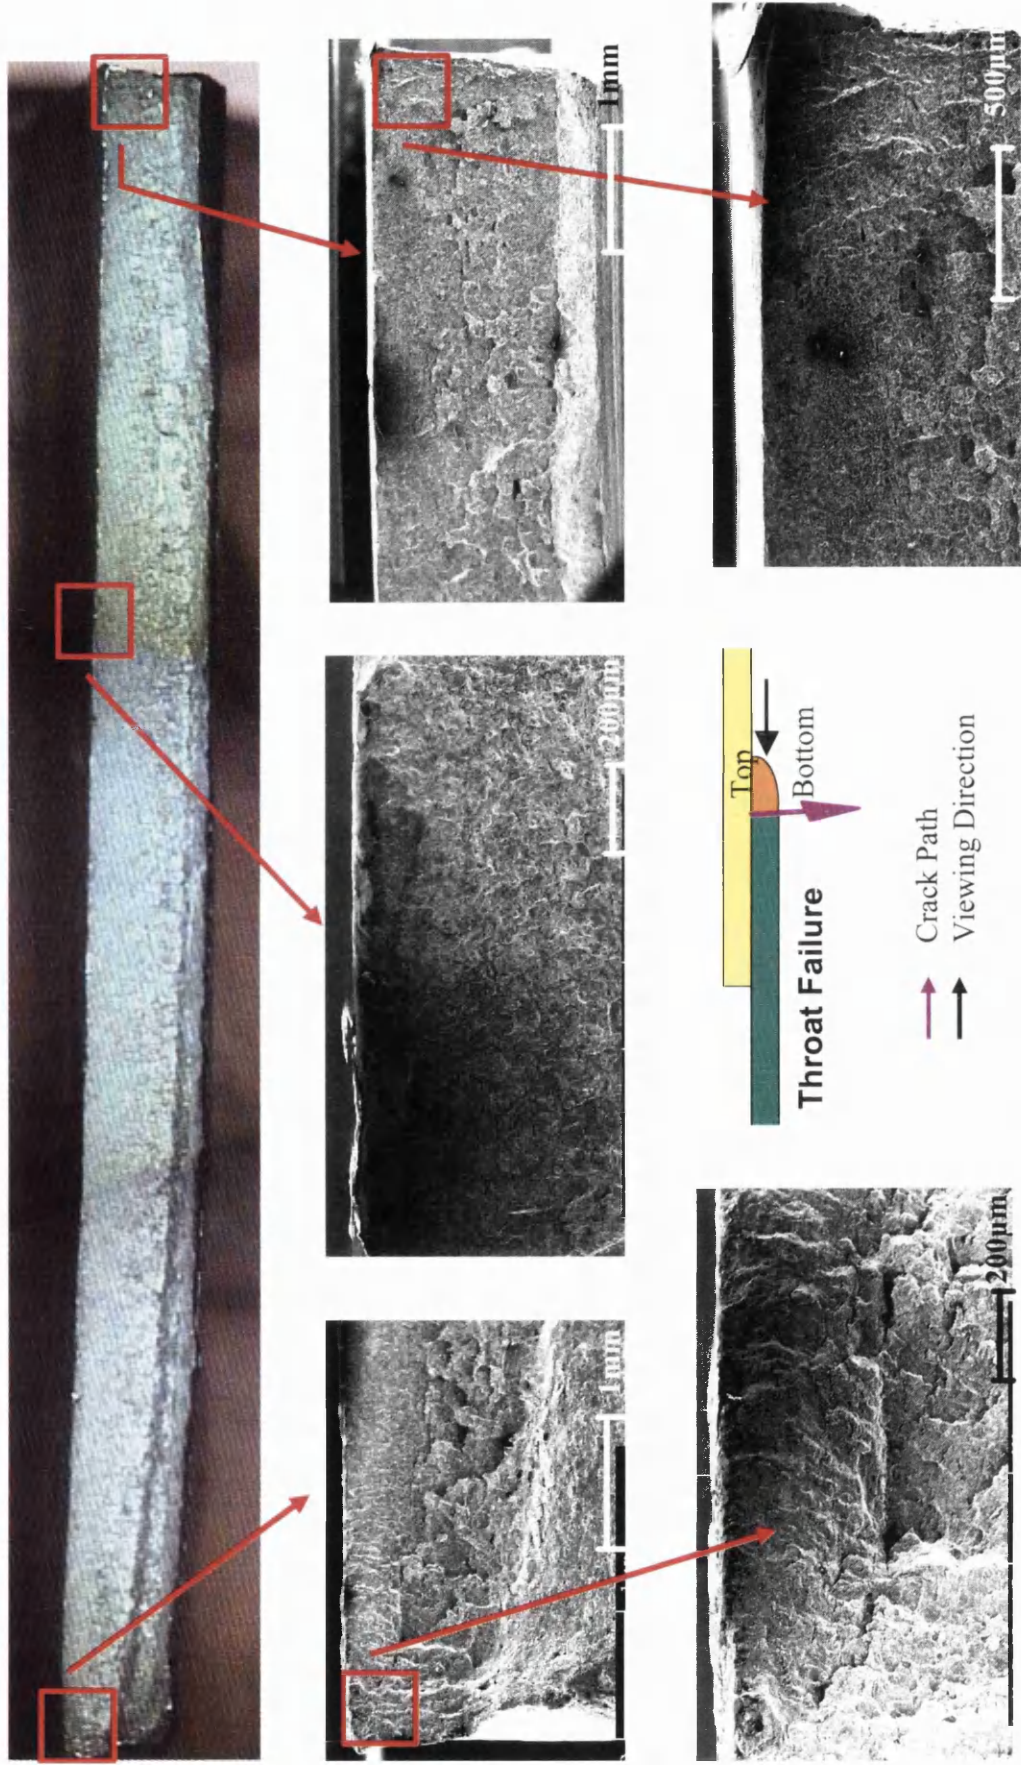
Typical Fracture Surface for TM2 Weld Throat Failure – Sheet View
